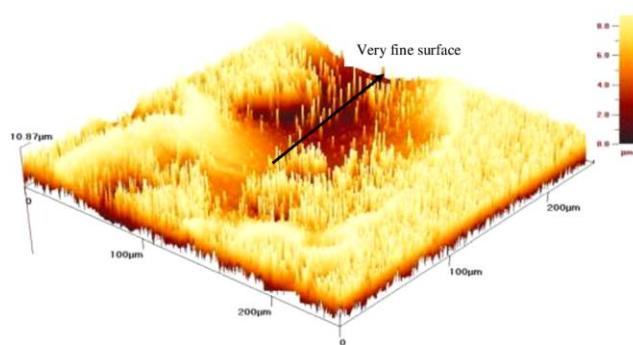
Surface finish of machined workpiece measured by optical surface profilometer.
